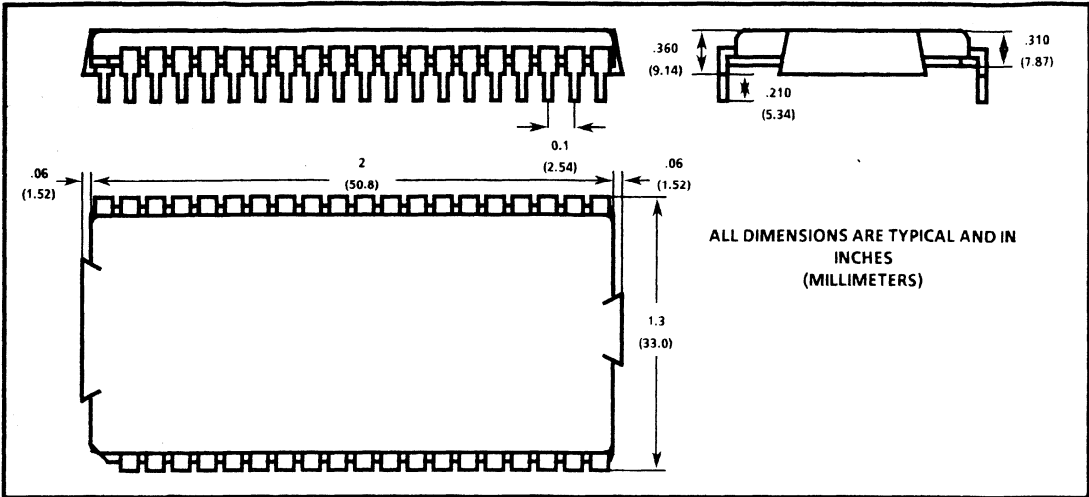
Physical Dimensions of 40 Pin Dual in Line Hybrid Package
